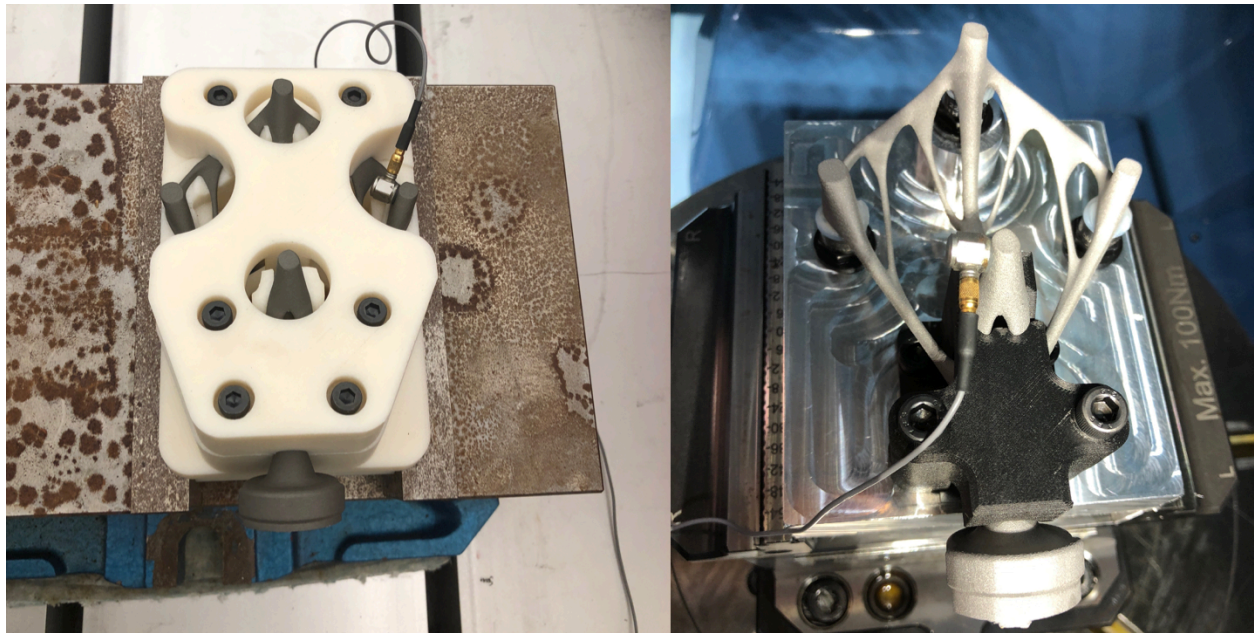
Impact hammer testing on different workpiece-fixture assemblies.
